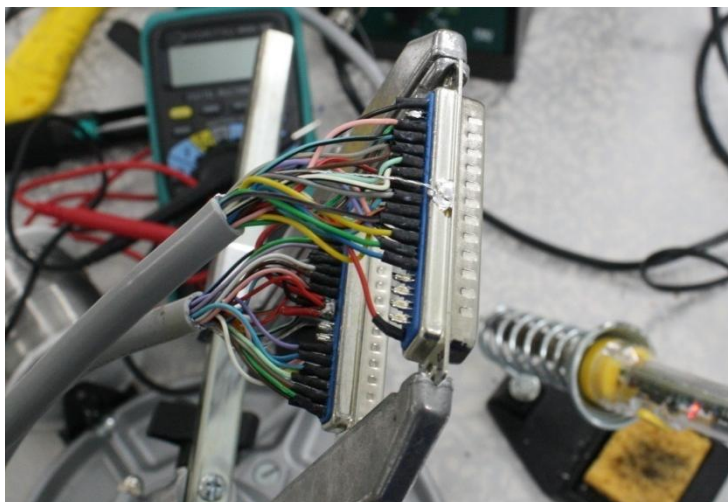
25 Core Wire Soldered to DB37 Connector Head
